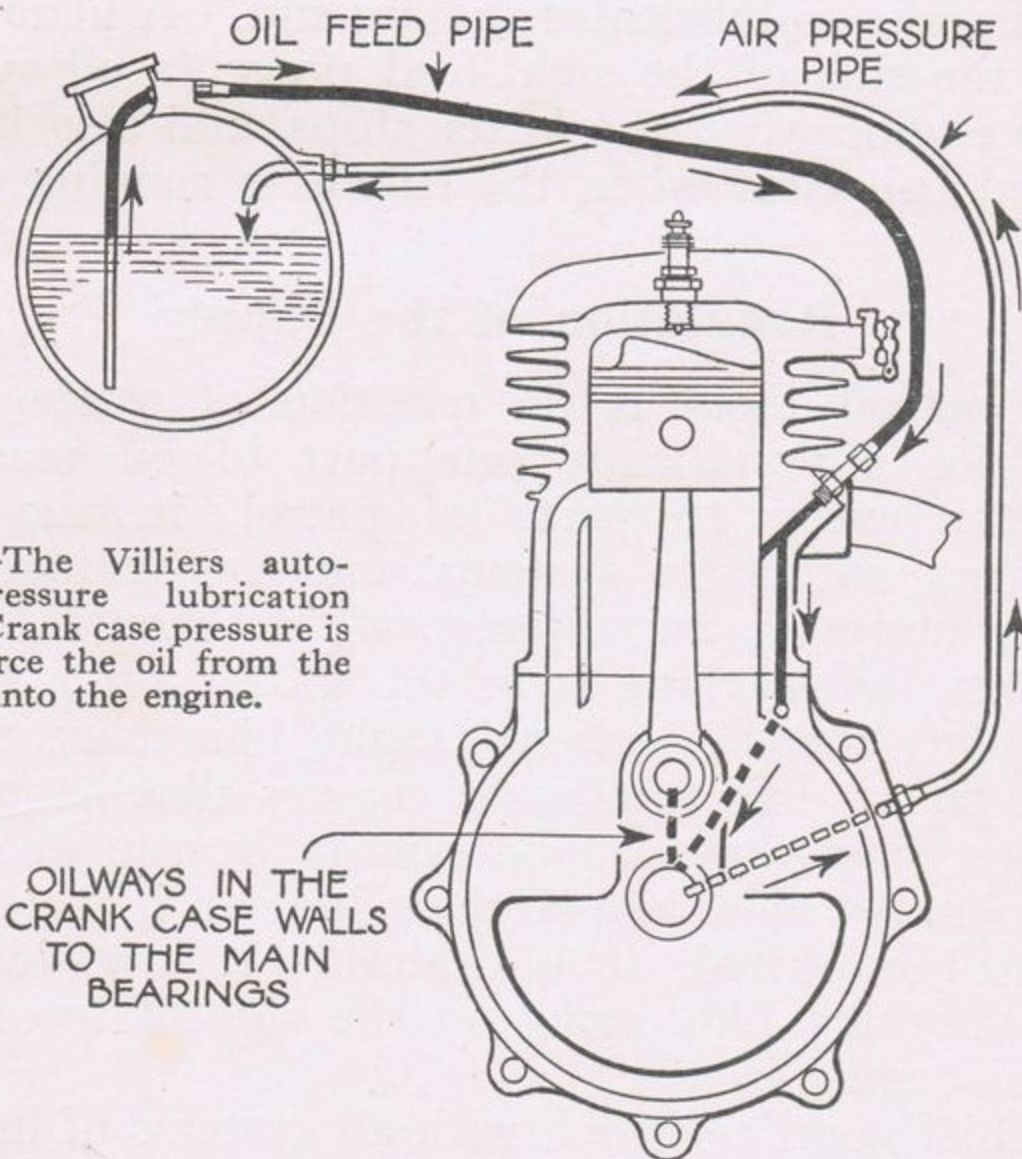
The Villiers automatic pressure lubrication system. Crank case pressure is used to force the oil from the tank into the engine.
